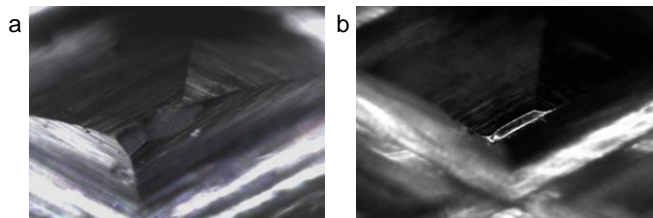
Optical Microscopy images of MT cutting tool (a) chipping mode tool failure found with cryogenic machining; (b) abrasive tool wear in the dry machining condition.
